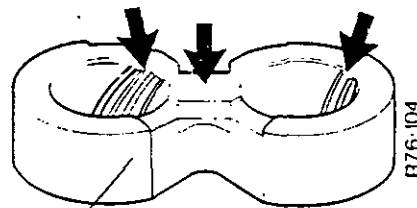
INSPECTION OF THE PUMP BEARINGS
